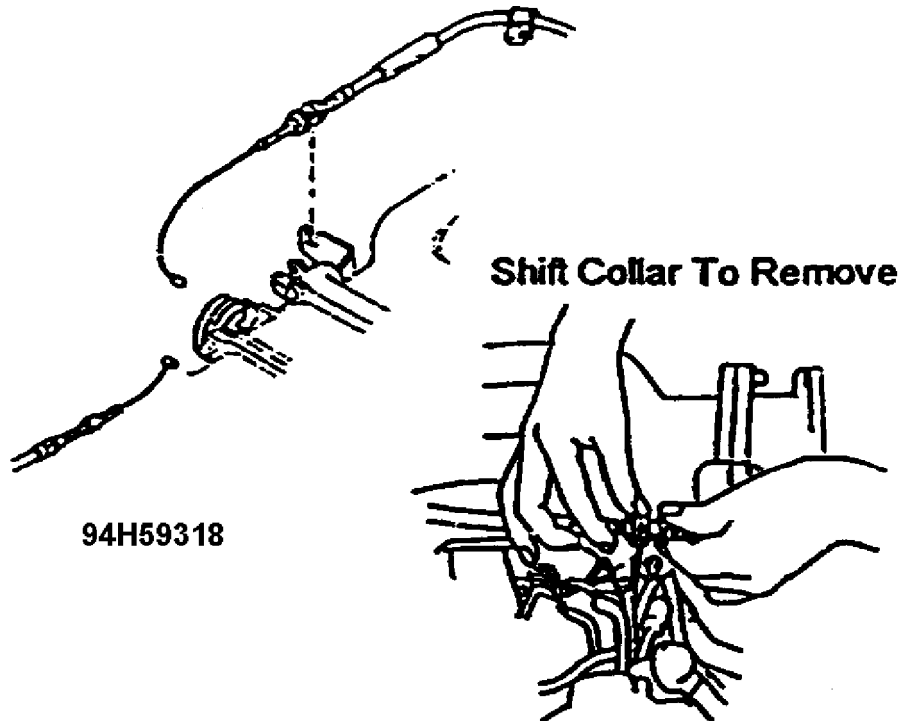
Removing Accelerator Cable & the Cruise Cable
